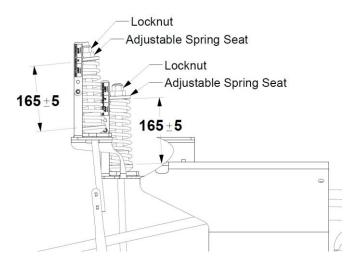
Primary & secondary chain tensioner spring setting (1000 RPM driveline)
